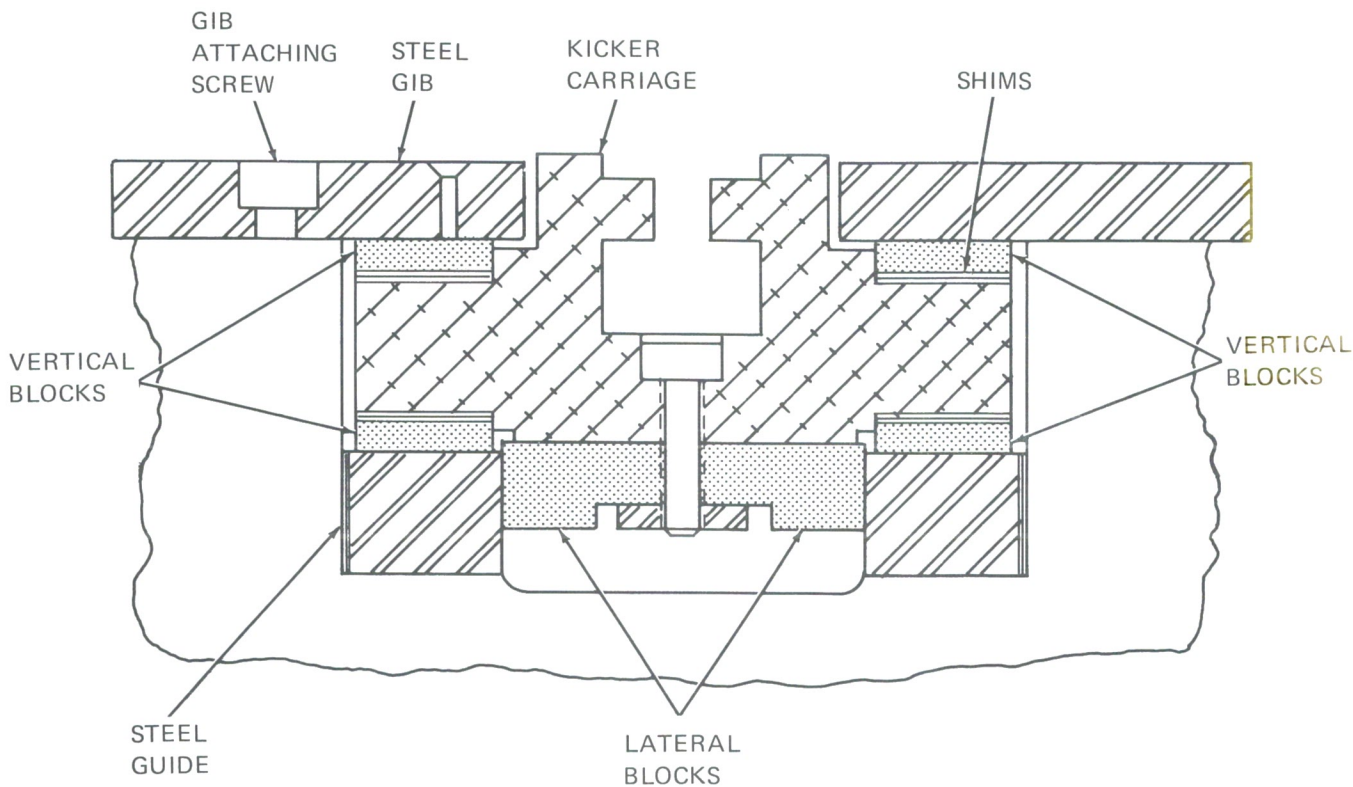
CHECKING KICKER CARRIAGE WEAR
